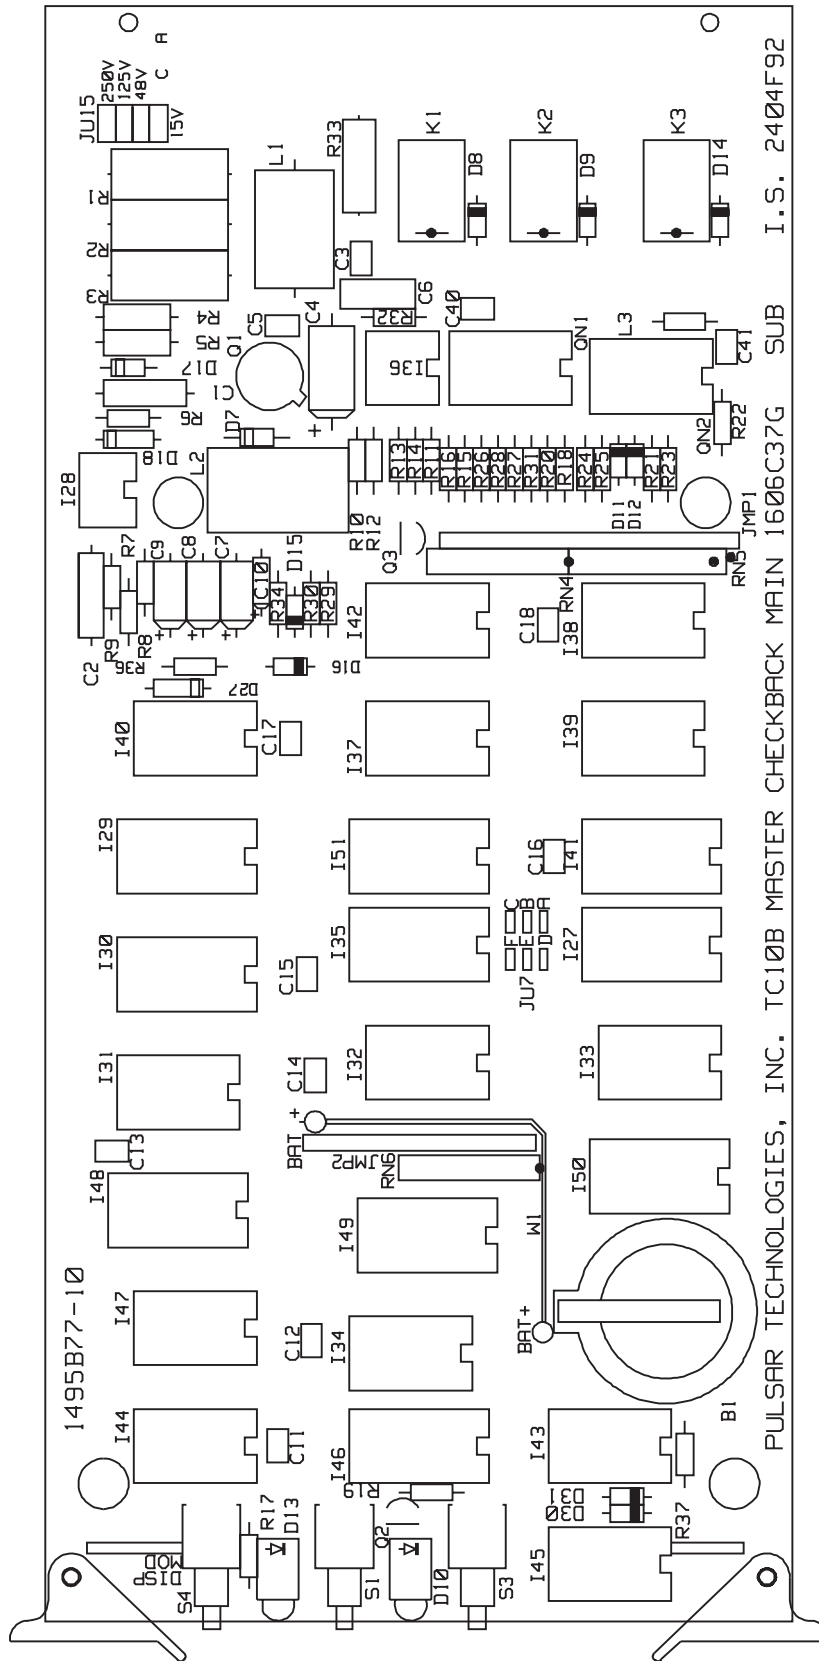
Automatic Checkback PC Boards — Master Main Board. (1495B77)
